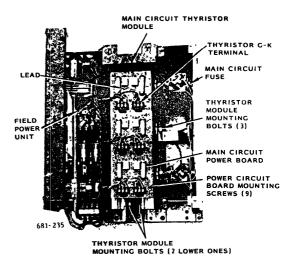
Main Circuit Thyristor Assembly (230V, 260A System)
